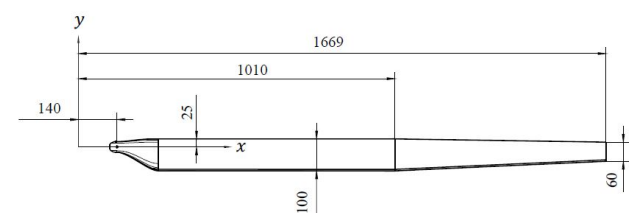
AREA rotor blade dimensions in mm when mounted on the AREA drone [22]
